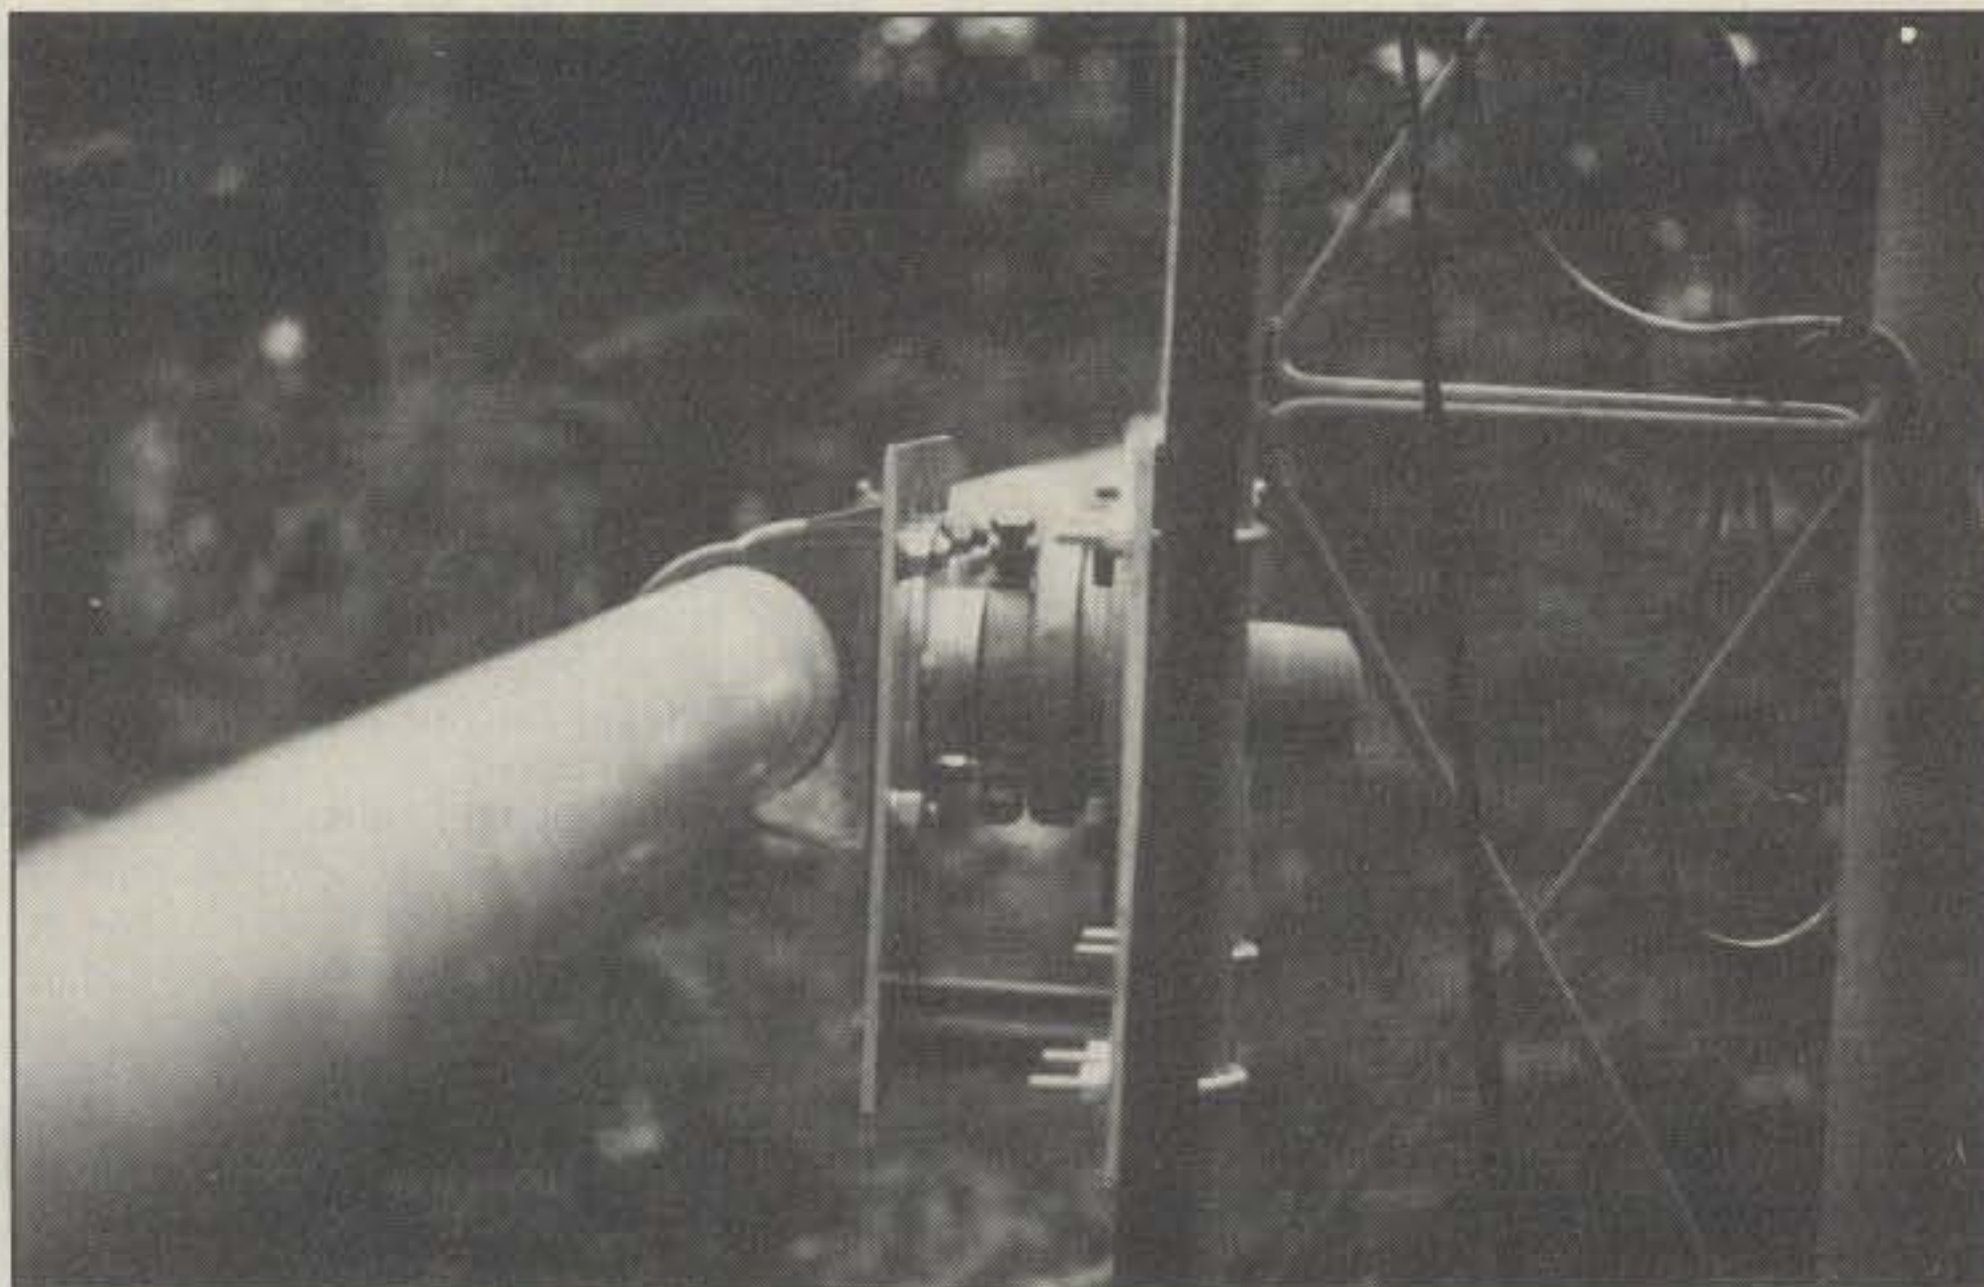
Rotatable boom-to-mast design with mast attached and nipple, without end-cap, fully inserted through thrust bearing. Note in the lower center of the photograph the #5 high-strength bolts used to secure the two aluminum plates after the antenna assembly process was complete.
